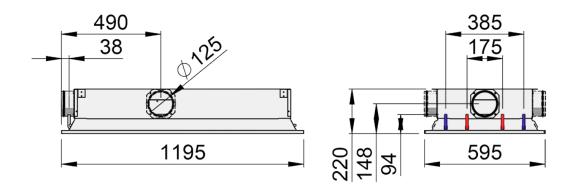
Halton Rex Expander dimensions (RXP-1200)
